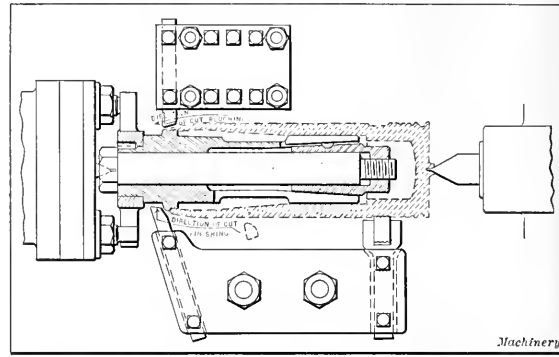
Tool Arrangement for turning Shrapnel Shell Point and knurling Groove at Closed End
